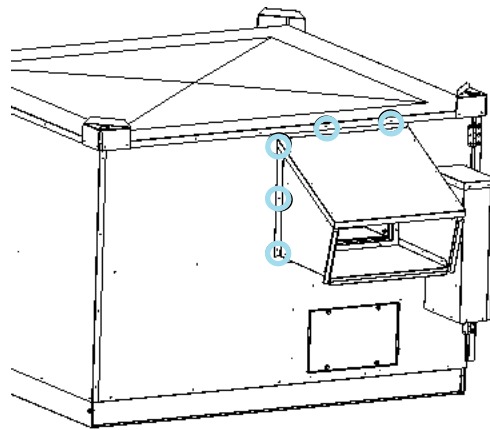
EXHAUST AIR HOOD (TYPICAL)
